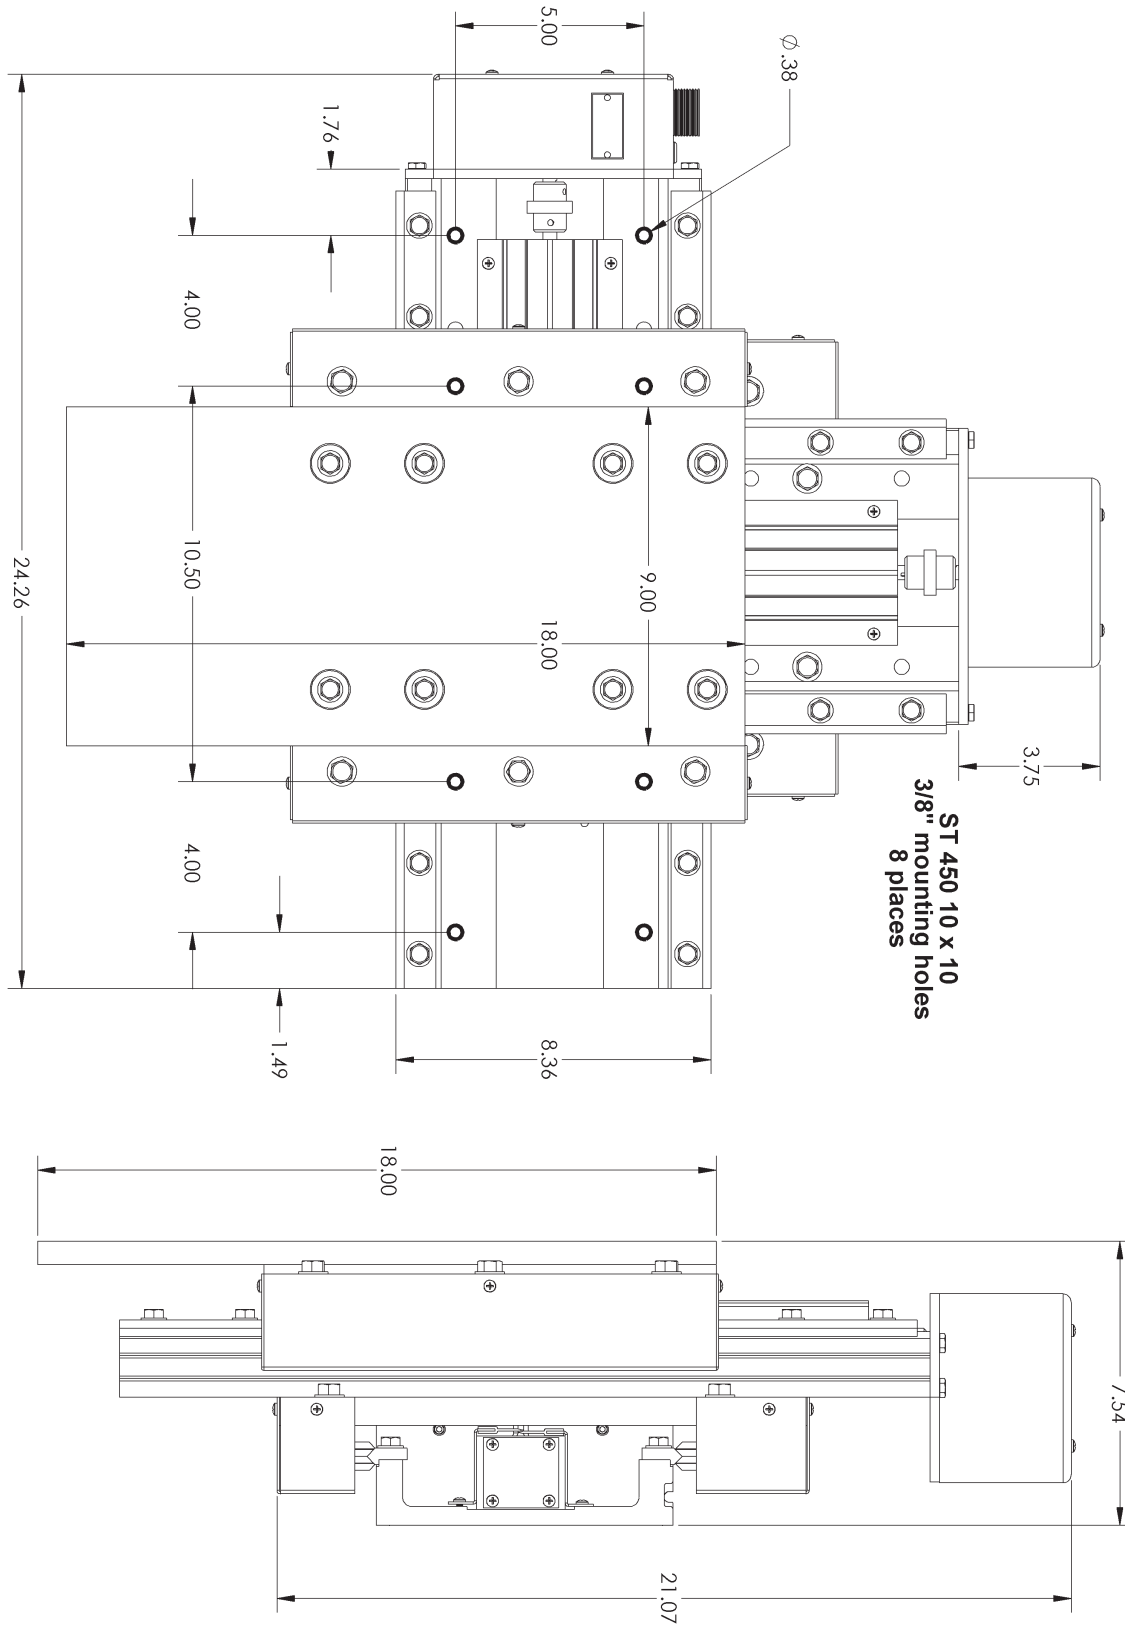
ST450 10 X 10 CROSS SLIDE MOUNTING DIMENSIONS
